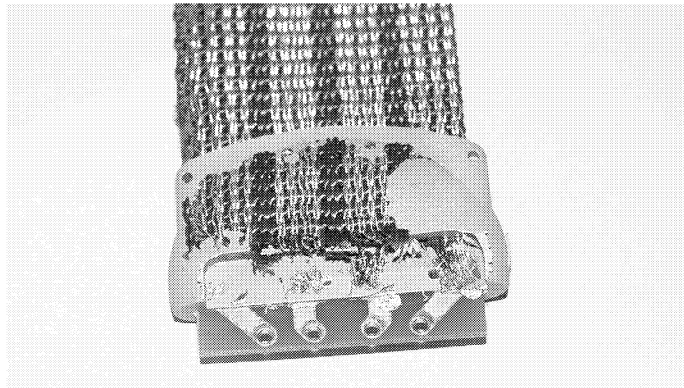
Overmold of PC Card Interface to Prototype Electronic Module
